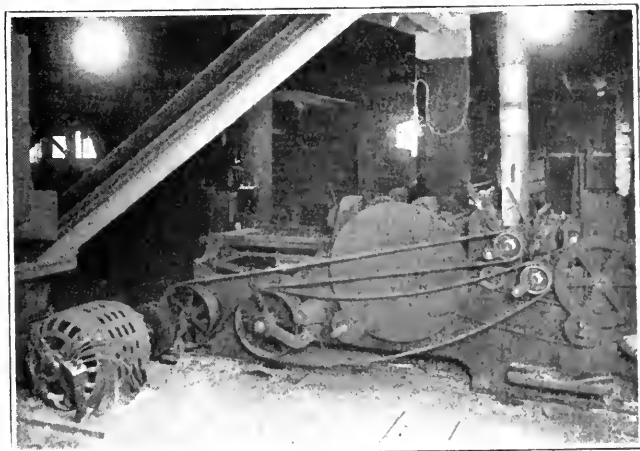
30-IN. DOUBLE SURFACER DIRECTLY CONNECTED TO 50-HP., 1200-R.P.M. ROLL-BEARING MOTOR
